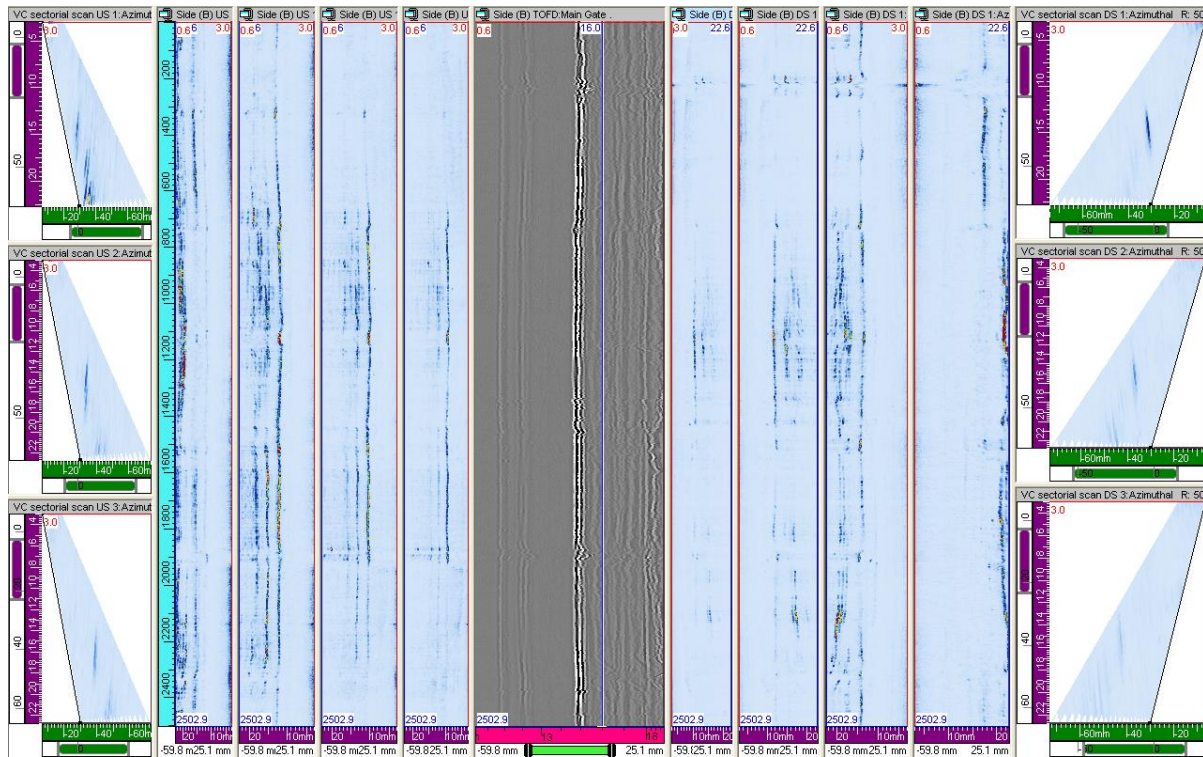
Weld MLA 4695 - EWI LPA Scan Screen Capture
